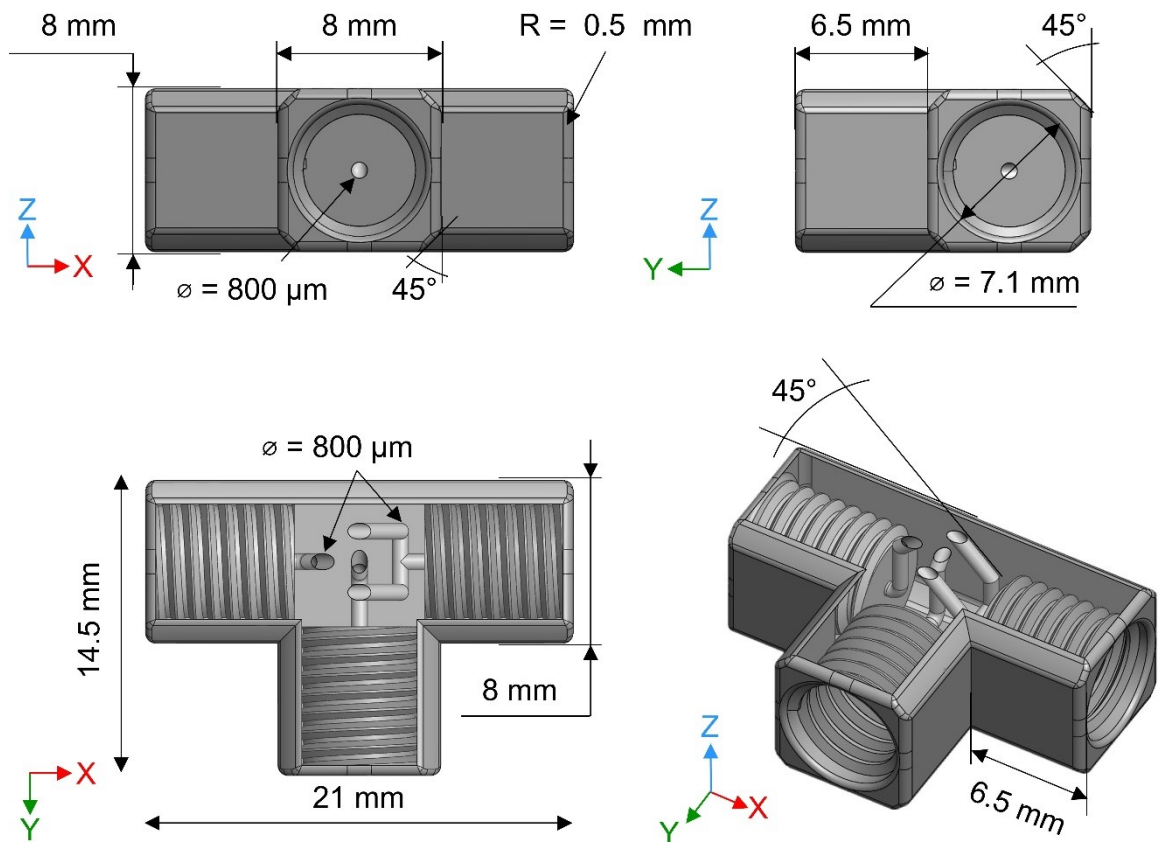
Dimensions of the 1PP manifold. Threads were modeled to receive right-handed 1/4-28 UNF fluid connectors. The thread depth is 9.25 mm. All interface channels to the 2PP chip egress the manifold at a 45° angle.
